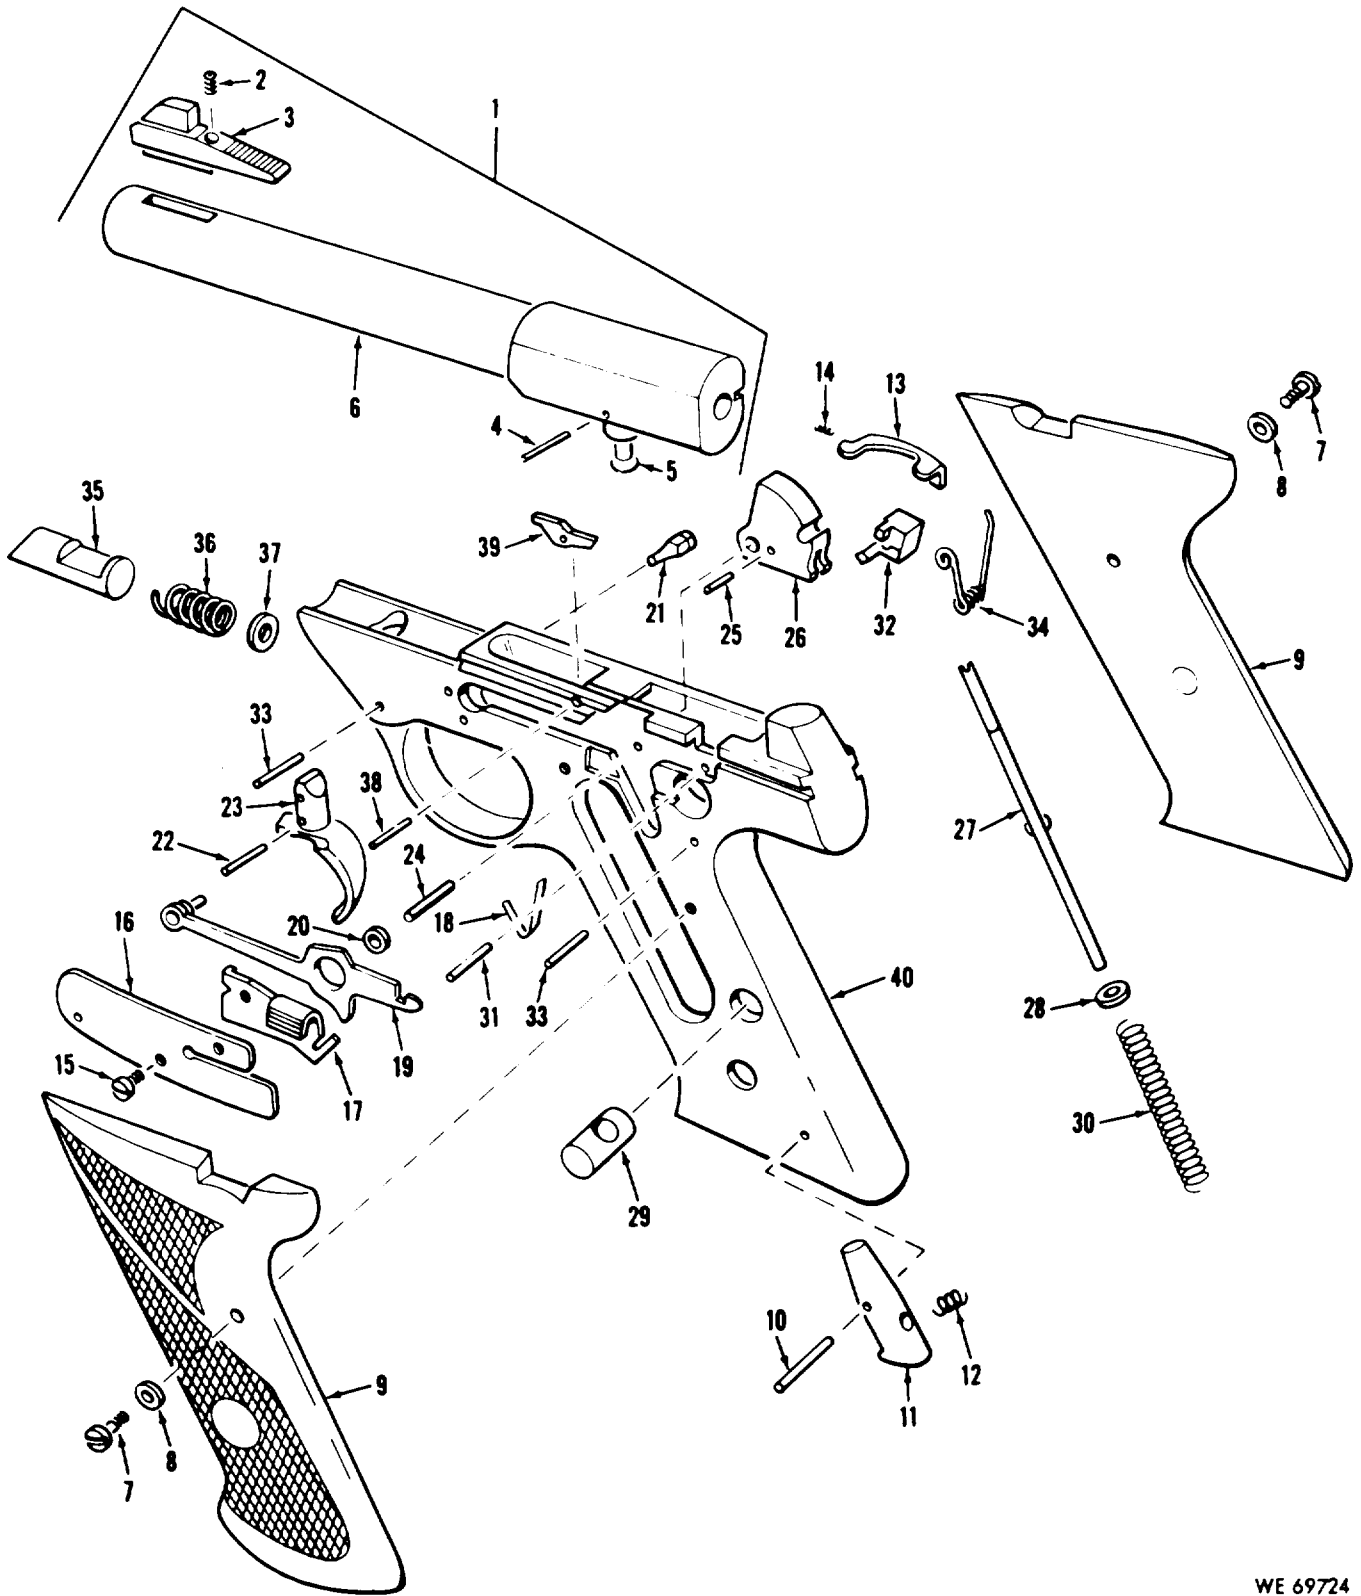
Barrel and receiver group Hi-Standard Supermatic Tournament cal. .22 automatic pistol-exploded view
